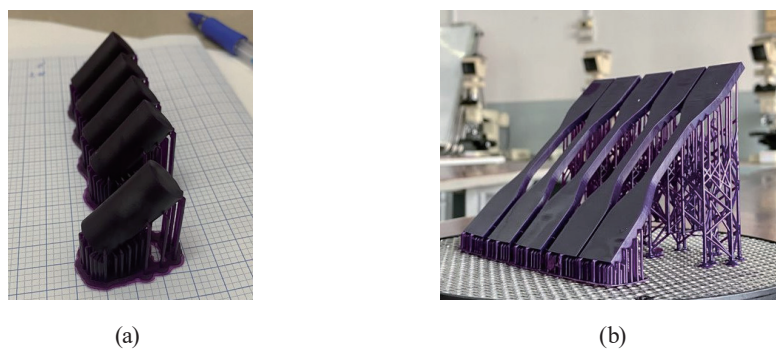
(Color online) Samples printed at the angle of 45°: (a) compressive and (b) tensile samples.
